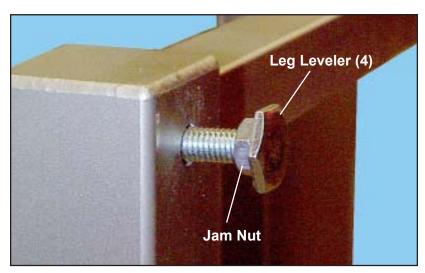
Leg Leveler with Jam Nut Mounted in Skid Bolt Hole
